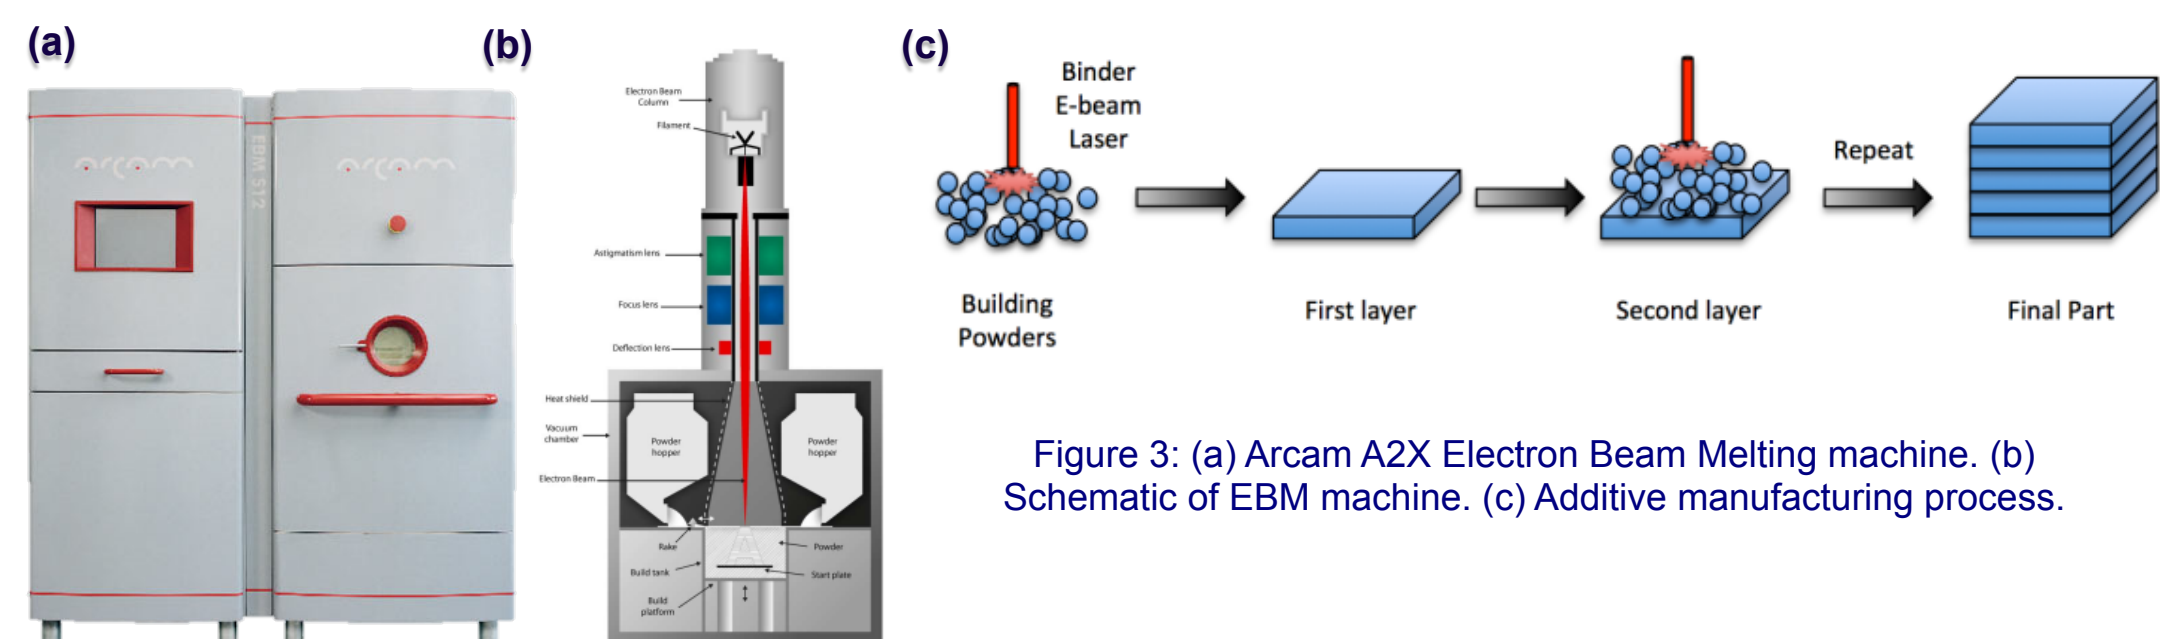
(a) Arcam A2X Electron Beam Melting machine. (b) Schematic of EBM machine. (c) Additive manufacturing process.
